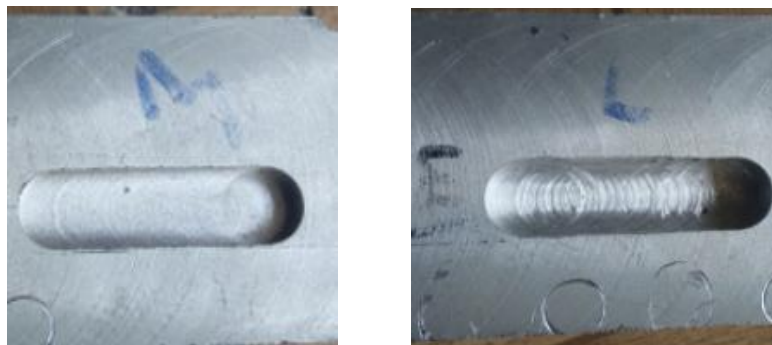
Keyway milling on a bar a) by milling machines b) by fixture
